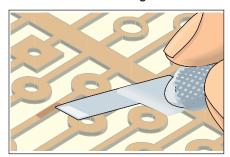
Scrape off the adhesive bonding film from solder joint area.
